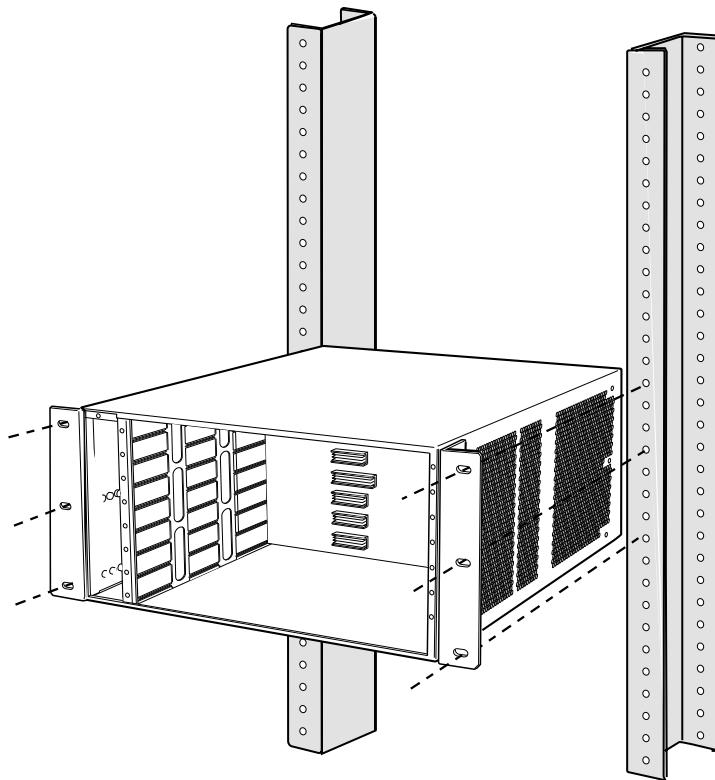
Installing the RS 16000 chassis in an equipment rack
